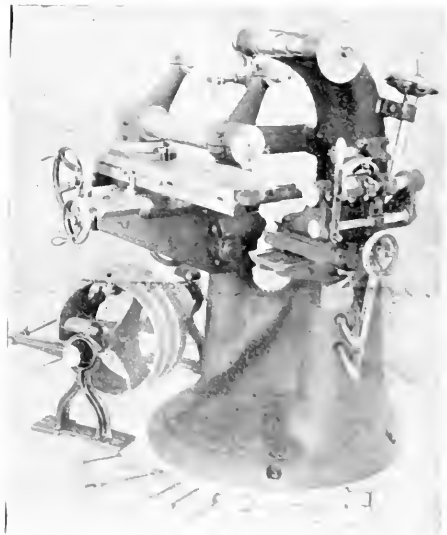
No. 1 Fourteen-inch Cutter and Reamer Grinder.
